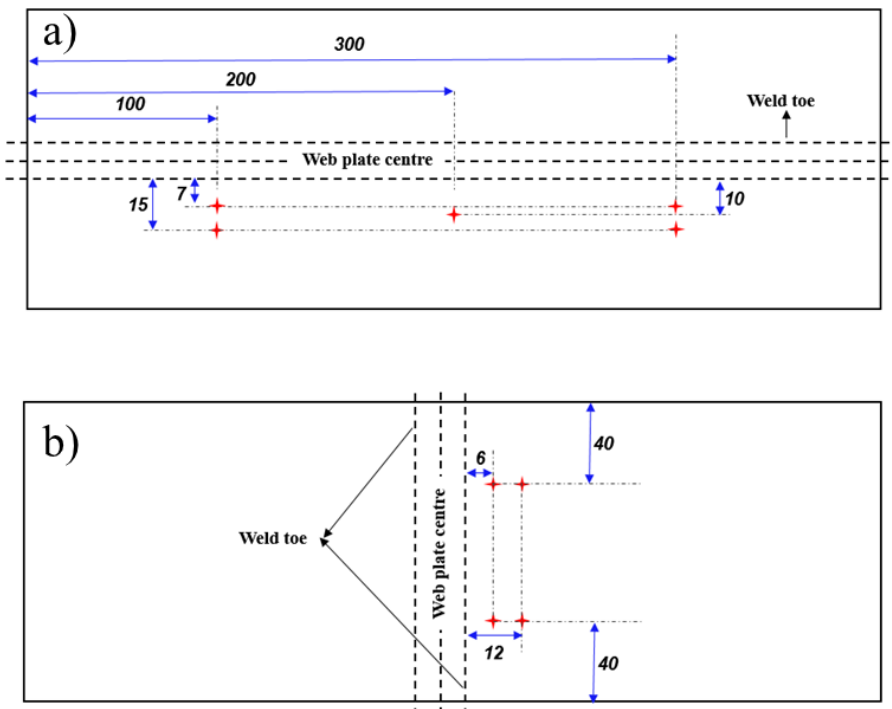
Thermocouple locations on the fillet welded plates: a) Fillet welded plate with the long weld along 400mm edge and, b) fillet welded plate with the short weld along 140mm edge.
